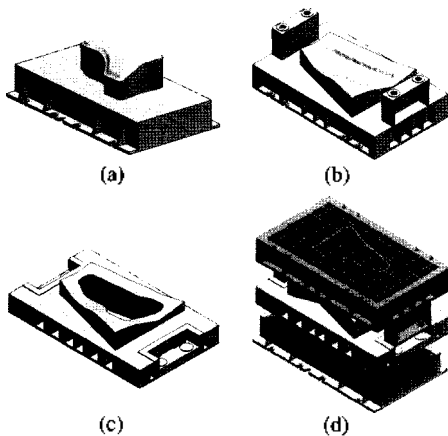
Case study for a fender panel: (a) lower die, (b) upper die, (c) blank holder, (d) die assembly.
